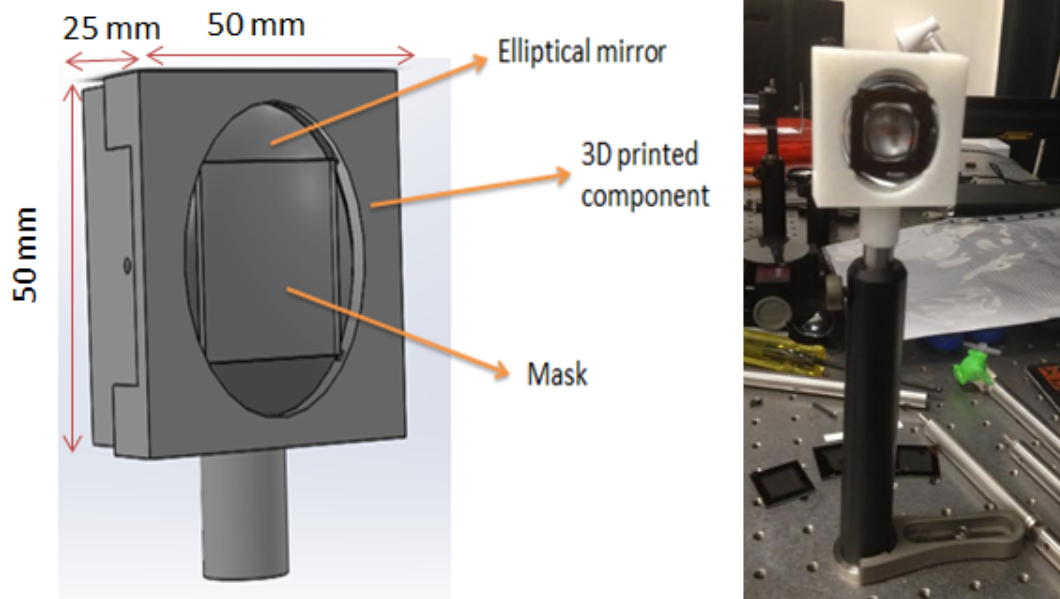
a) Drawing of 3D printed module b) Realized prototype
